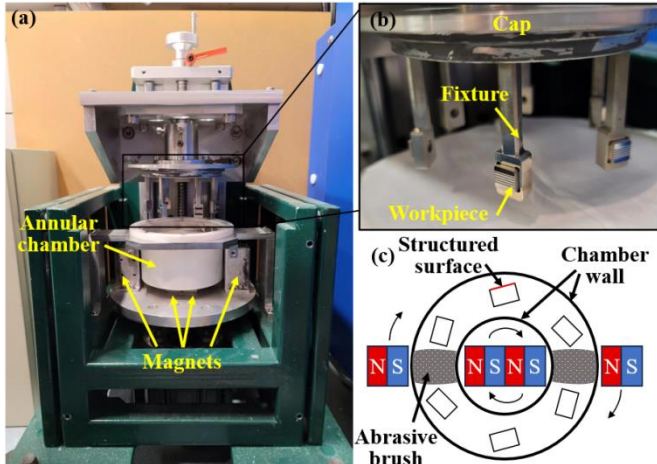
MABP Experimental setup for structured surfaces (a) MABP machine (b) workpieces mounted on the fixtures and the cap (c) schematic diagram of MABP process.
